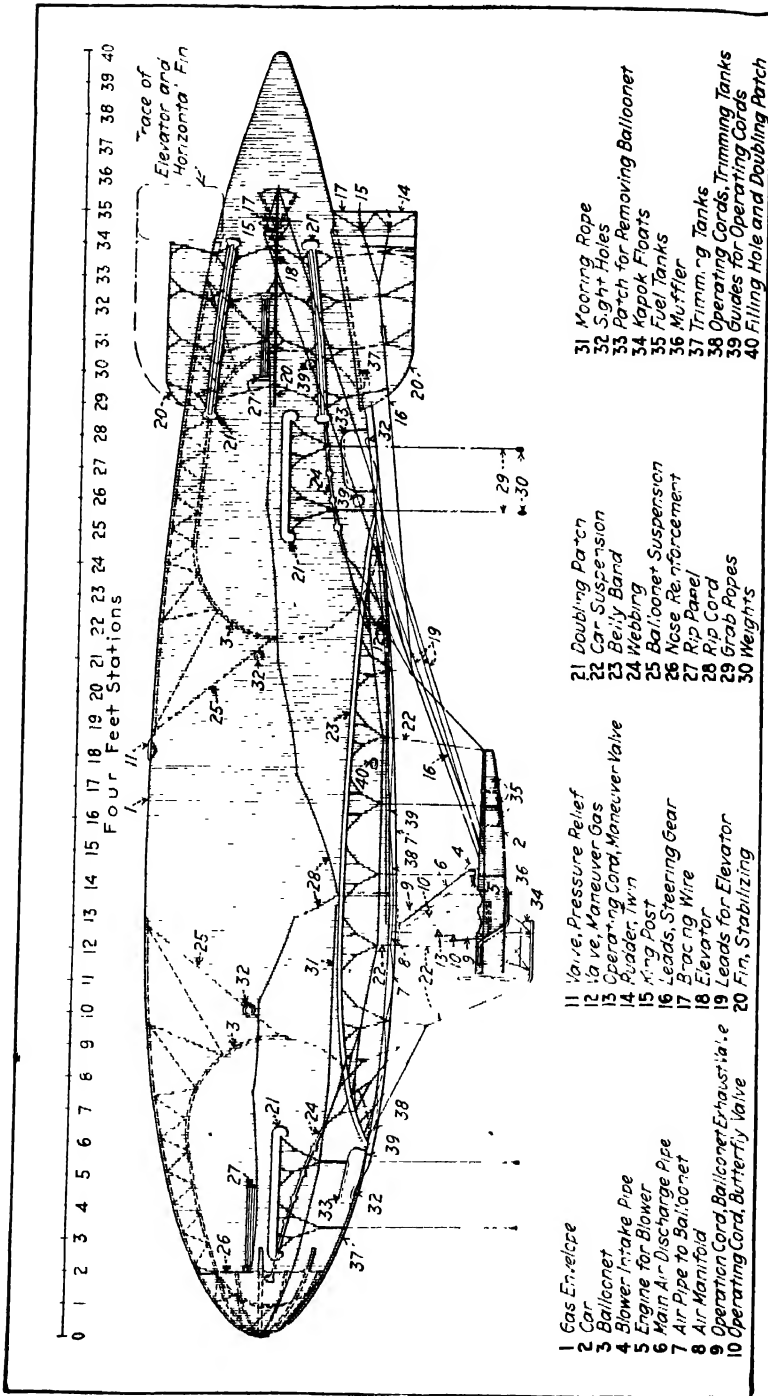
General Arrangement Plan for Early Type Navy "Blimps."
